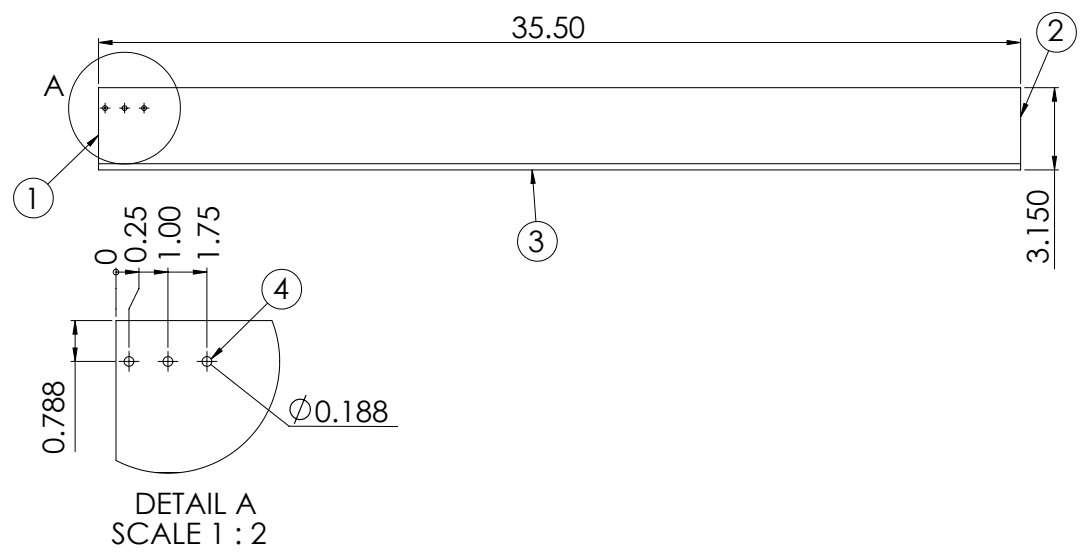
Finished blade dimensions, numbers indicate order of finish machining
